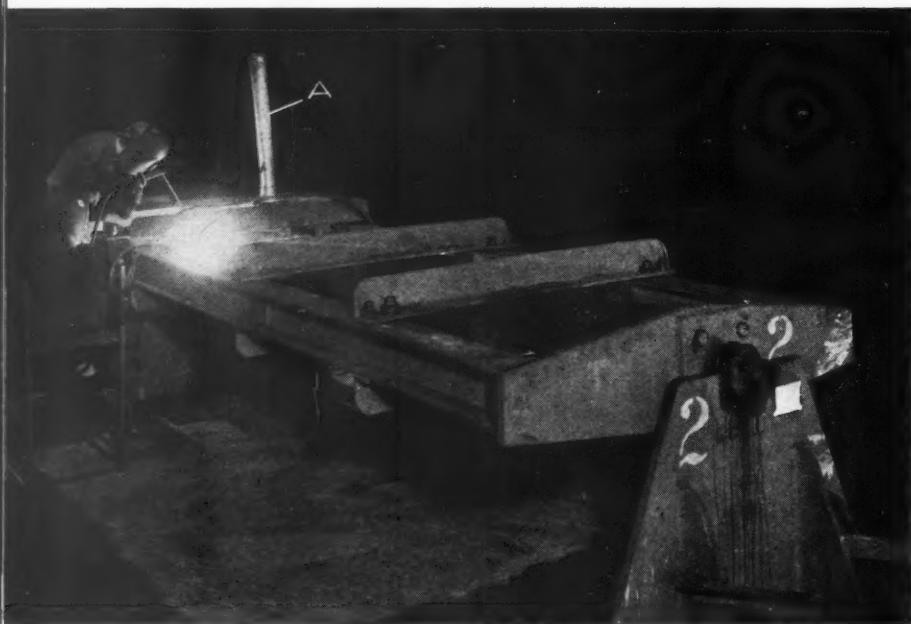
A welder using the down-hand technique in welding the side plate to the side extension plate while the two plates are held in an improvised positioner. Venturi type exhaust blower (A) carries harmful fumes away from welder
